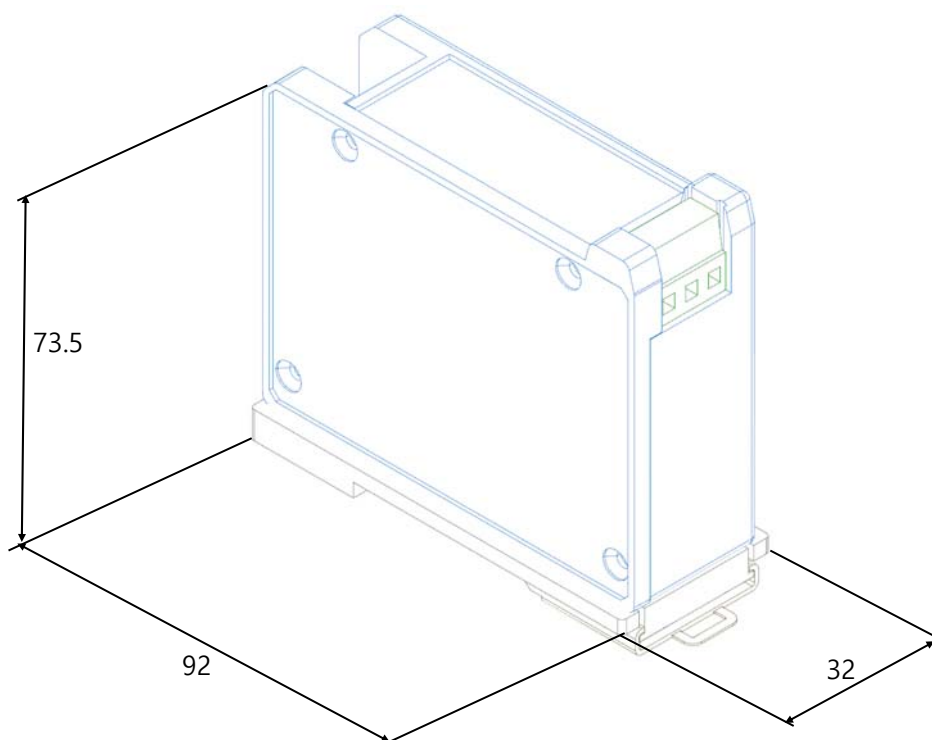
Probe Driver — DIN Rail Mounting (35mm)
